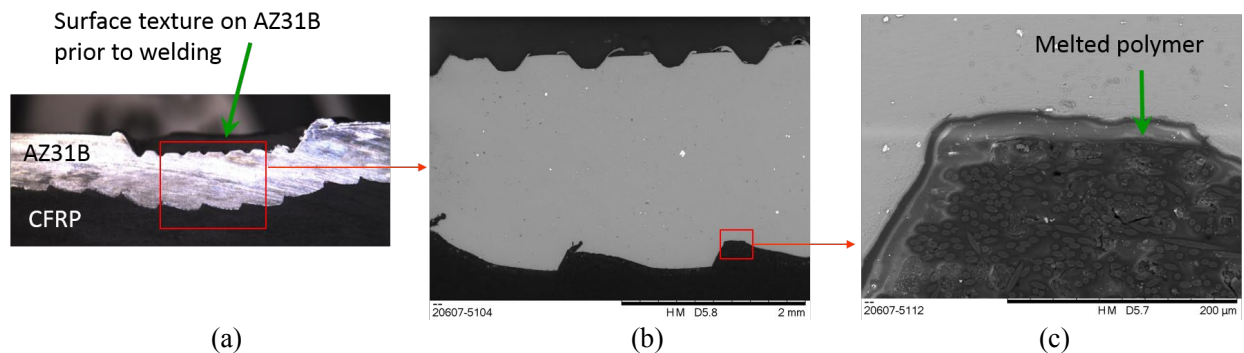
I.11. Weld joint produced with pre-textured surface on AZ31B. (a) Surface texture on AZ31B before welding. (b) AZ31B and TP-CFRP joint. (c) Expanded view of TP-CFRP melted into AZ31B alloy. Source: ORNL.
